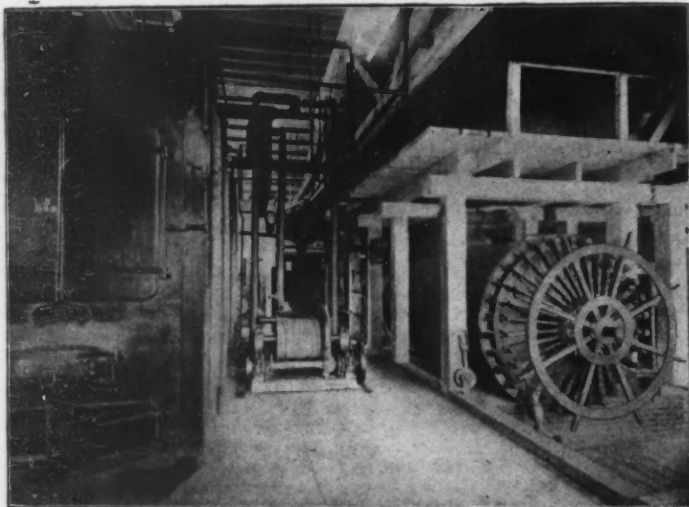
INTERIOR OF WOOD FIREPROOFING PLANT, SHOWING CYLINDERS, WITH SOLUTION TANK OVERHEAD, AND THE PIPING SYSTEM.
